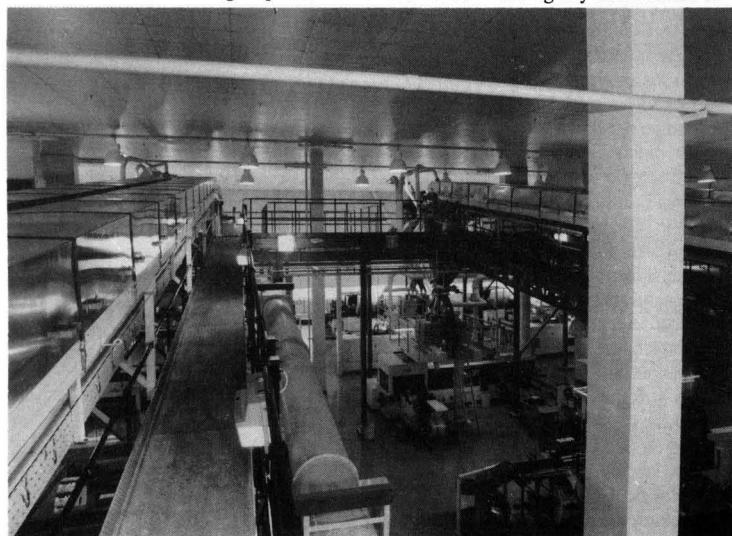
View of the packaging hall showing feed conveyor to individual packaging machines
